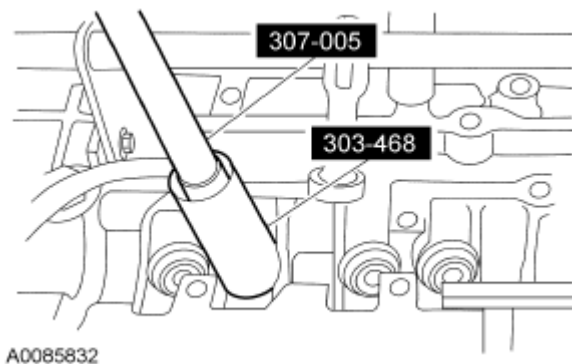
Removing Valve Seals Using Special Tools (307-005, 303-468)
